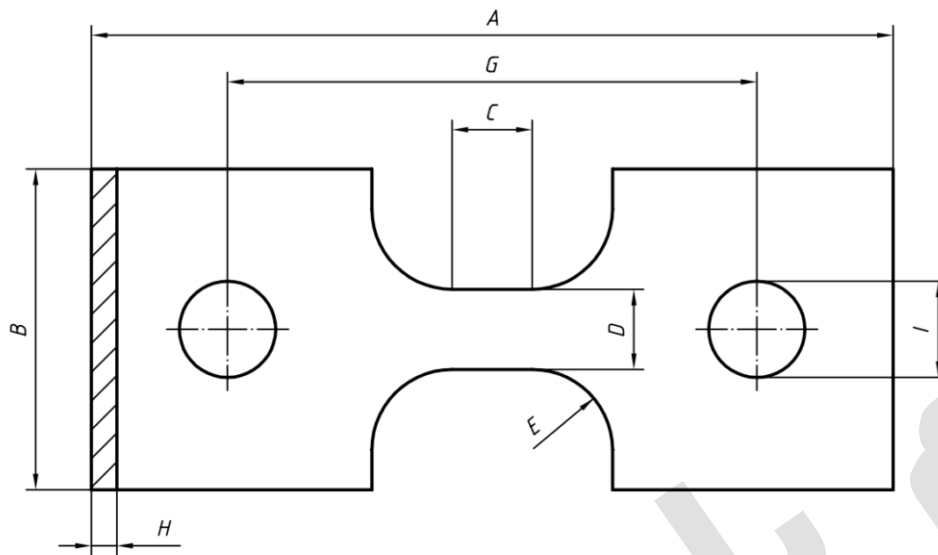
Machined type B tensile test piece (for $e \geq 25$ mm)
